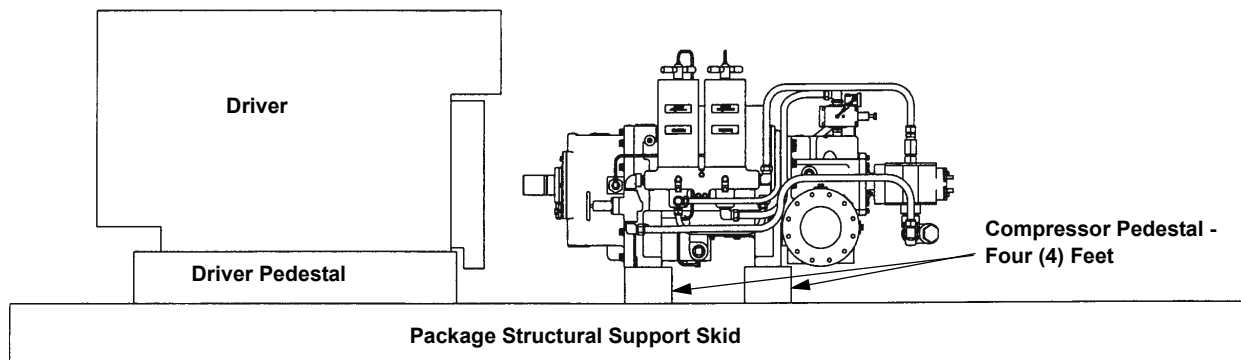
DRIVER/RGM COMPRESSOR ARRANGEMENT - TYPICAL W/O BELL HOUSING
